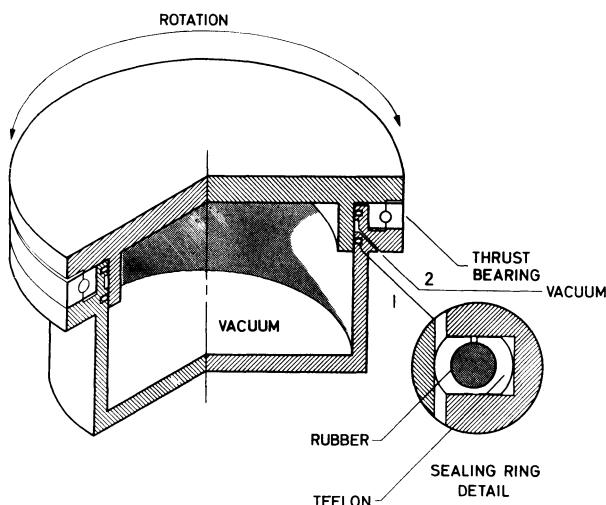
Rotary vacuum seal using Teflon O-rings and guard vacuum. After Armstrong⁴⁹⁶
